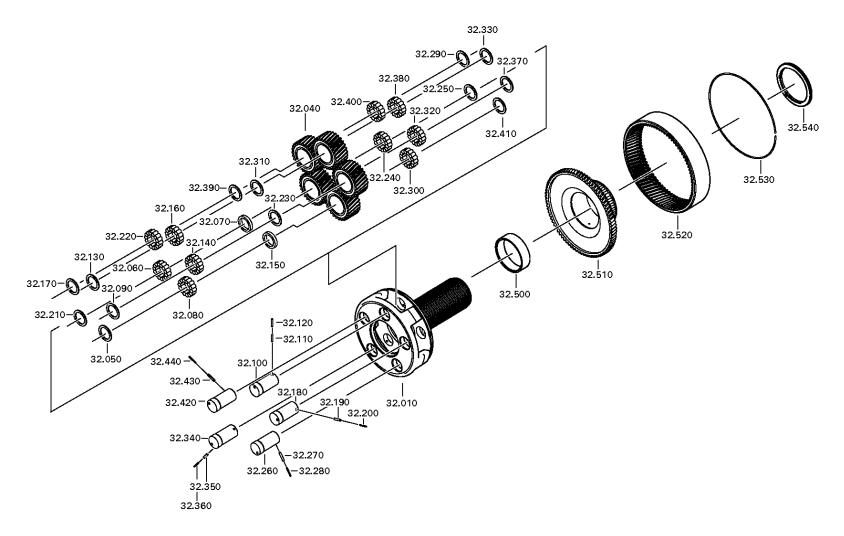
RC HOUSING 16 S 2531 TO / RC HOUSING
